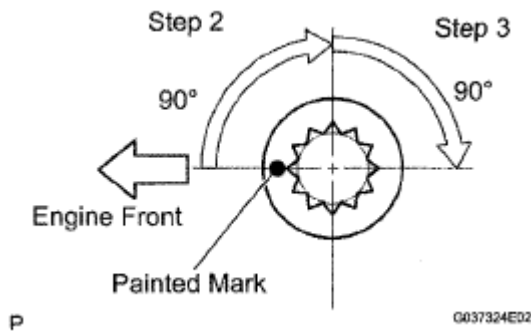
Marking Cylinder Head Bolt Head With Paint
